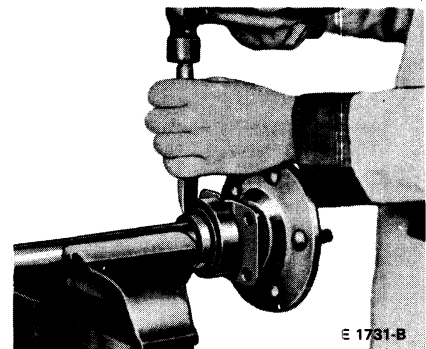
Removing Rear Wheel Bearing Retainer Ring
